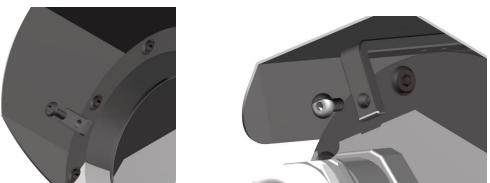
Removing the weather protection roof (1/2) (this illustration is an example)
